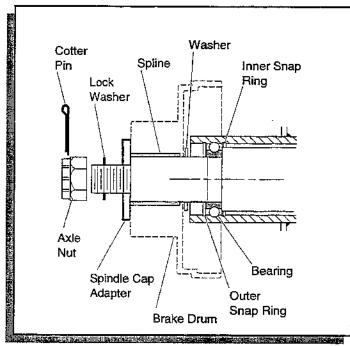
Cut Away of Outer Bearing and Brake Drum
